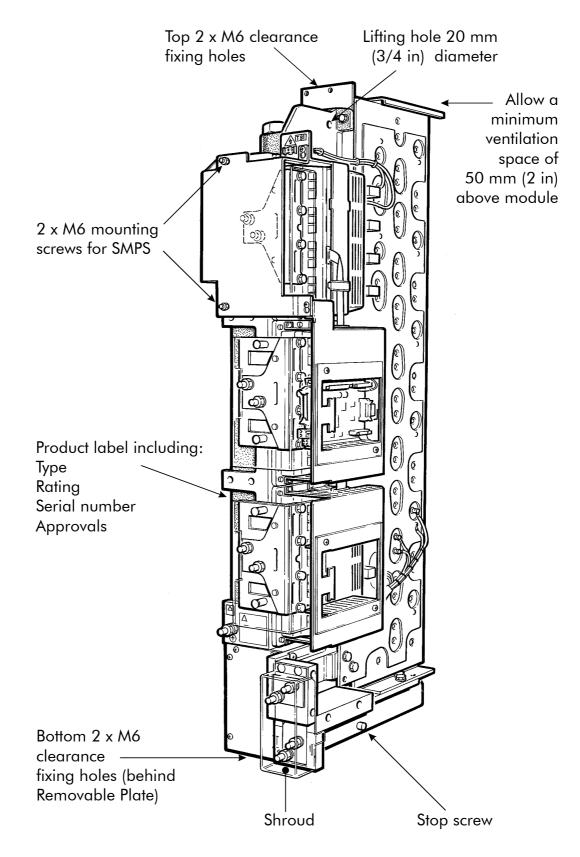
Typical View of a MV LCD Transistor Bridge Module showing Mechanical Details
